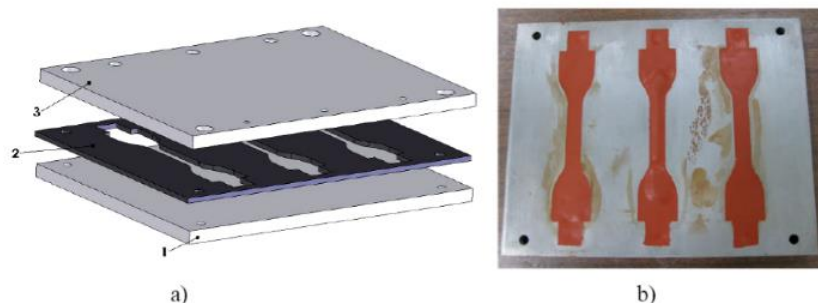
a) Mould for bulk specimen manufacture. b) Bulk specimens in mould
